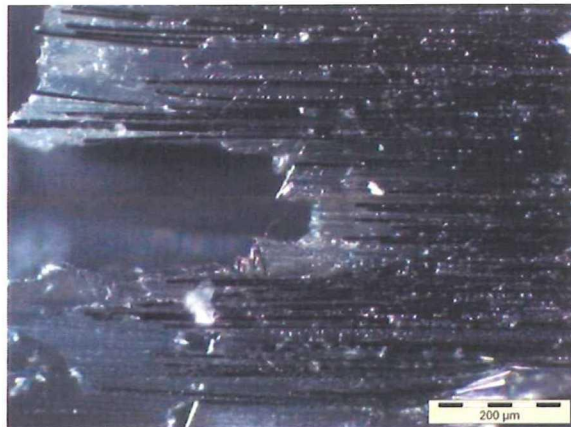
First-ply failure observed at the fracture surface of USW141001-01 which is welded with 720 [J].
